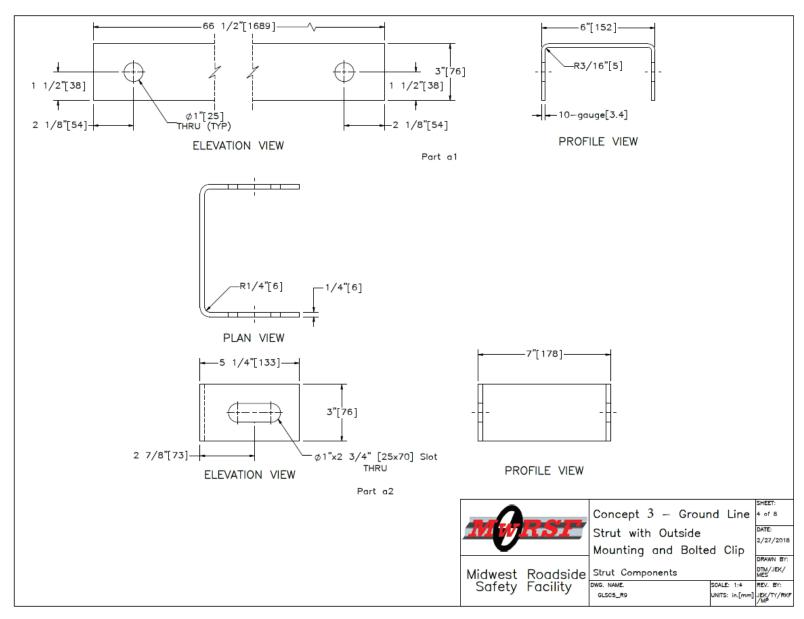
Ground Line Strut Design Concept No. 3 – Strut Components
